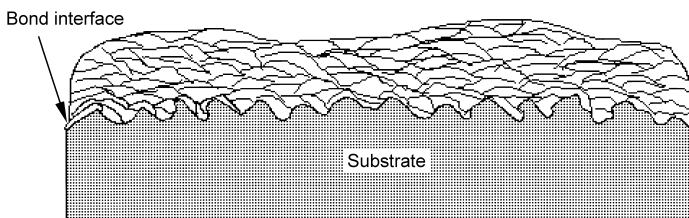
Mechanical bonding, showing a properly grit-blasted surface with a large number of reverse draft pits into which sprayed particles flow to achieve positively keyed mechanical interlocking
